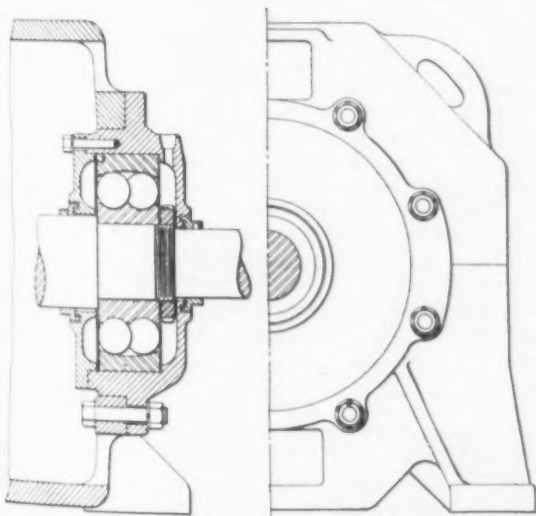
Ball Bearing Mounting on Mill Type Motor, with Bearing Carried Directly on the Shaft
